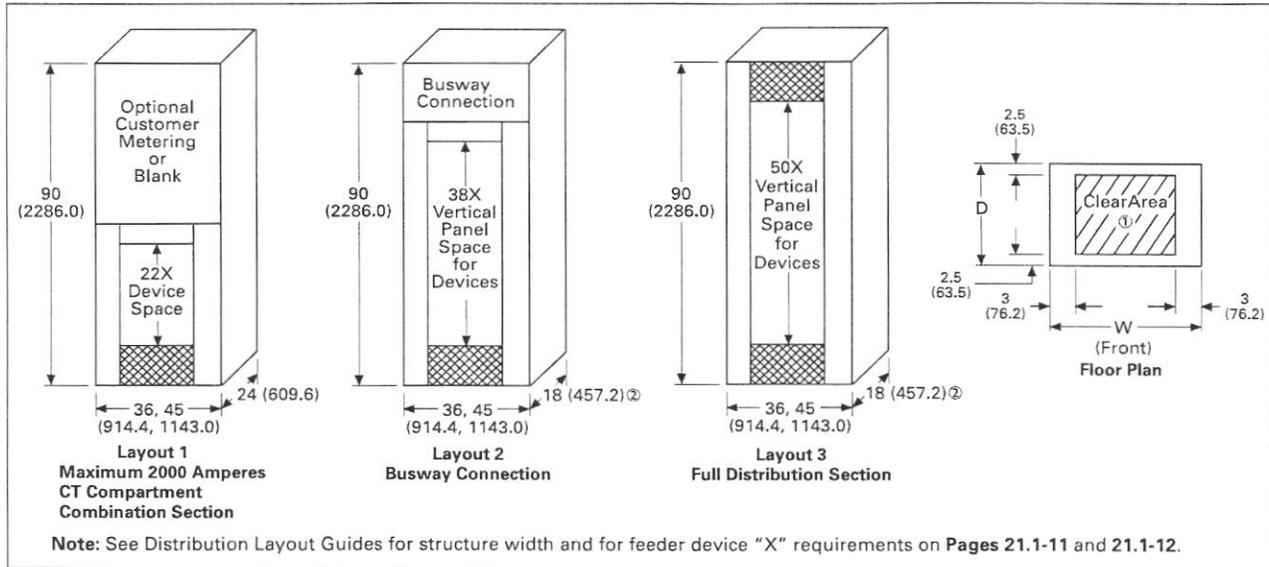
Distribution Section Layouts — Dimensions in Inches (mm)
